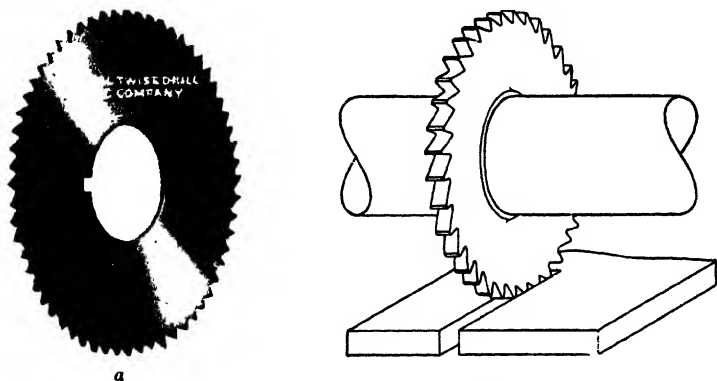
Metal-slitting cutter: (a) cutter; (b) sawing action. (*The National Twist Drill and Tool Company*)
